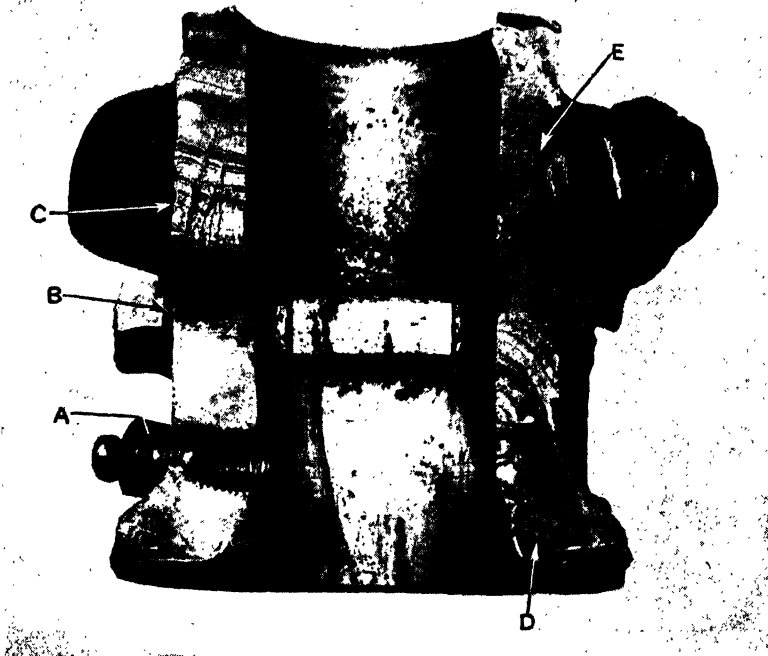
Fatigue fracture of steering knuckle of a bus. The fracture was initiated at the lubrication fitting *A*, propagated to the hole at *B* and then around the thick section upward through *C* where the "shell" markings appear very distinctly. The fracture then started at the bottom on the opposite side, at *D* and went halfway up. At this point with only a small fraction of metal holding it together, a regular fibrous break occurred through this remainder or *E*.
